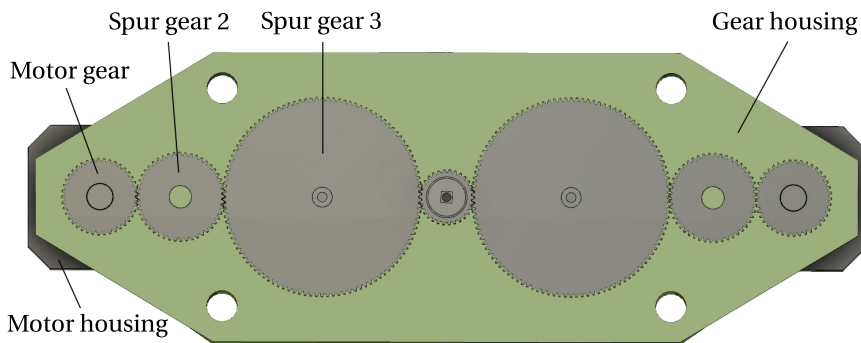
Rear view of the electro-mechanical shear ram actuator with the gear housing cover removed, showing the spur gear arrangement. Figure provided by ESD.
